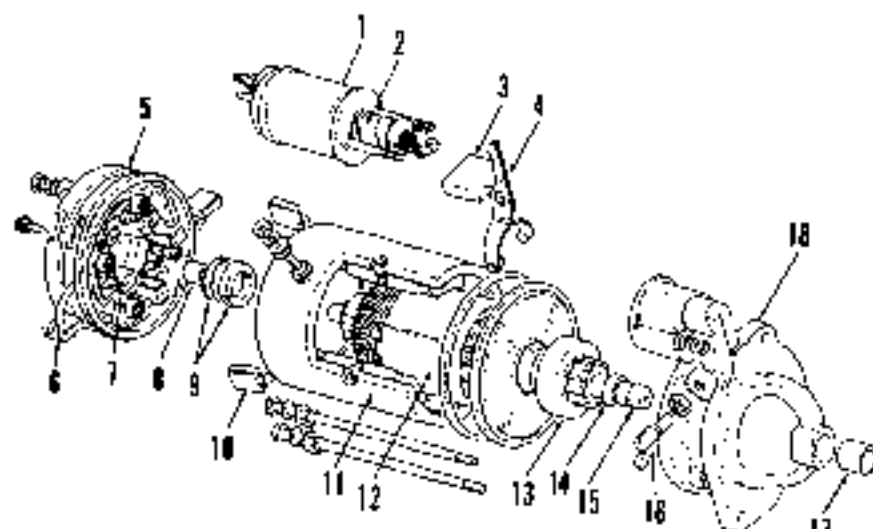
Exploded view of typical Lucas starting motor used on some MF240 and MF250 tractors.
